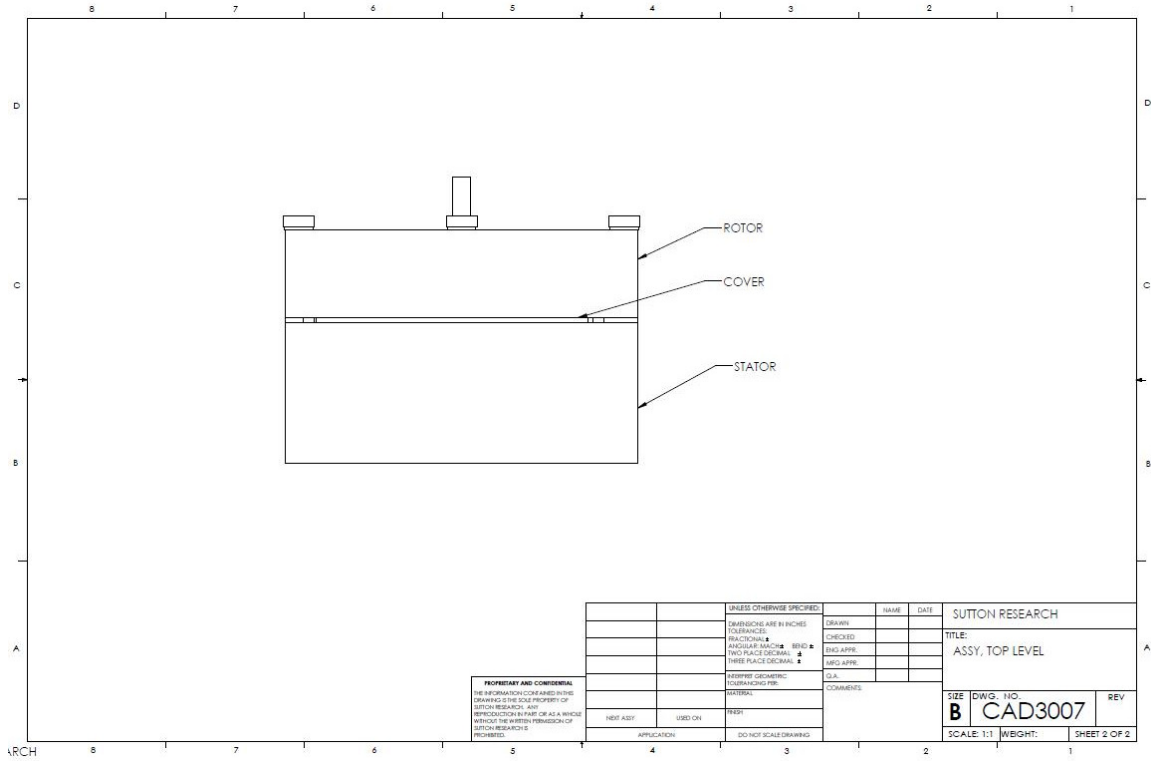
Assembly, Top Level, Drawing, Orthogonal View. This figure details the top level assembly for the permanent magnet machine built and tested for experiments 3 and 4.
